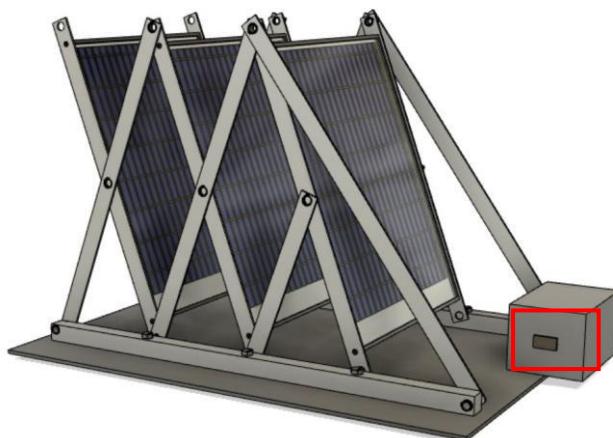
Position on full mechanism affixed to the gearbox, highlighted in red
